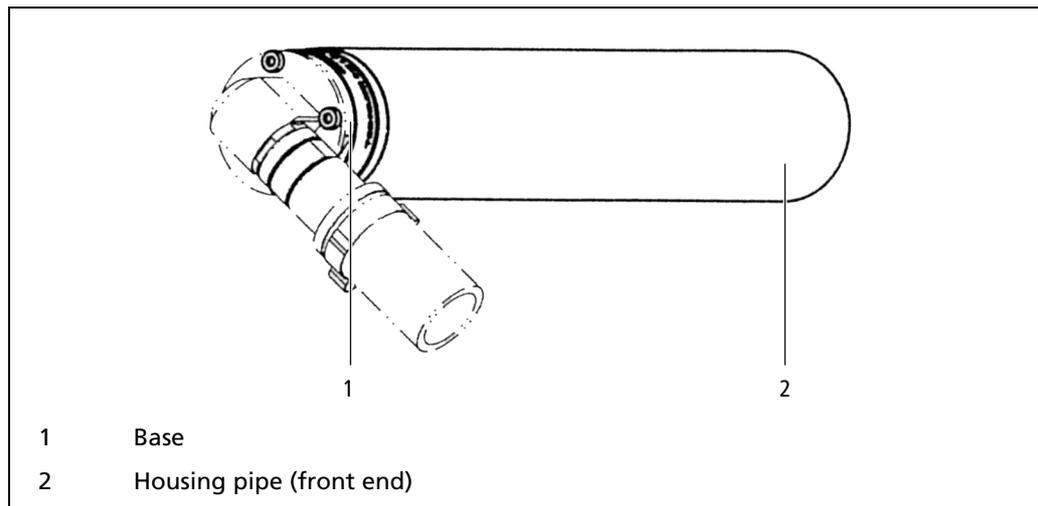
GAMMAcast detector LB 6739 with housing pipe
